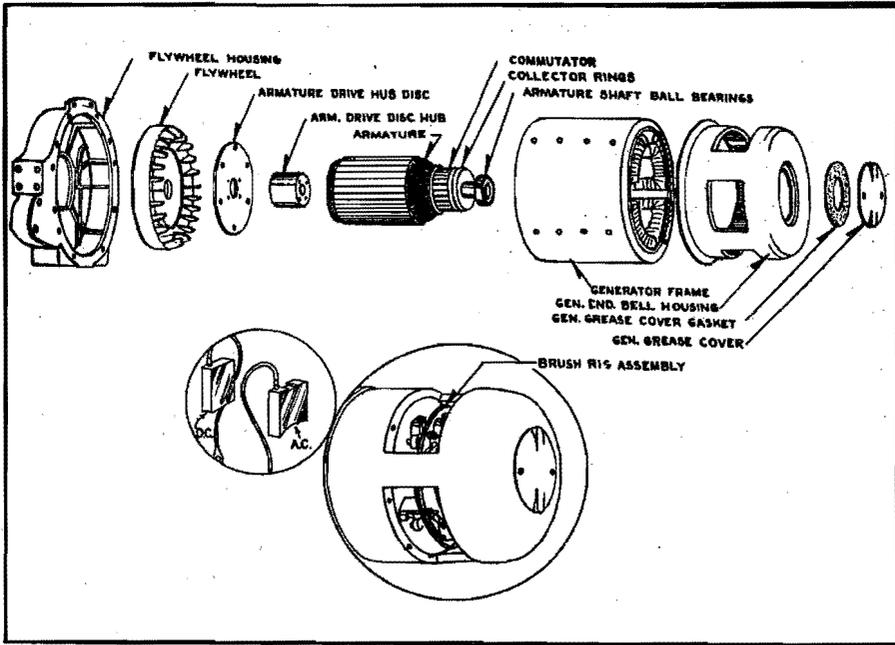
FIG. K-ALTERNATING CURRENT GENERATOR ASSEMBLY
